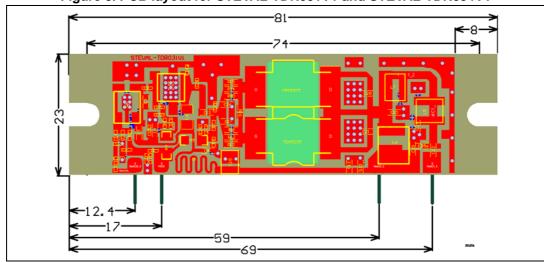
PCB layout for STEVAL-TDR031V1 and STEVAL-TDR034V1
